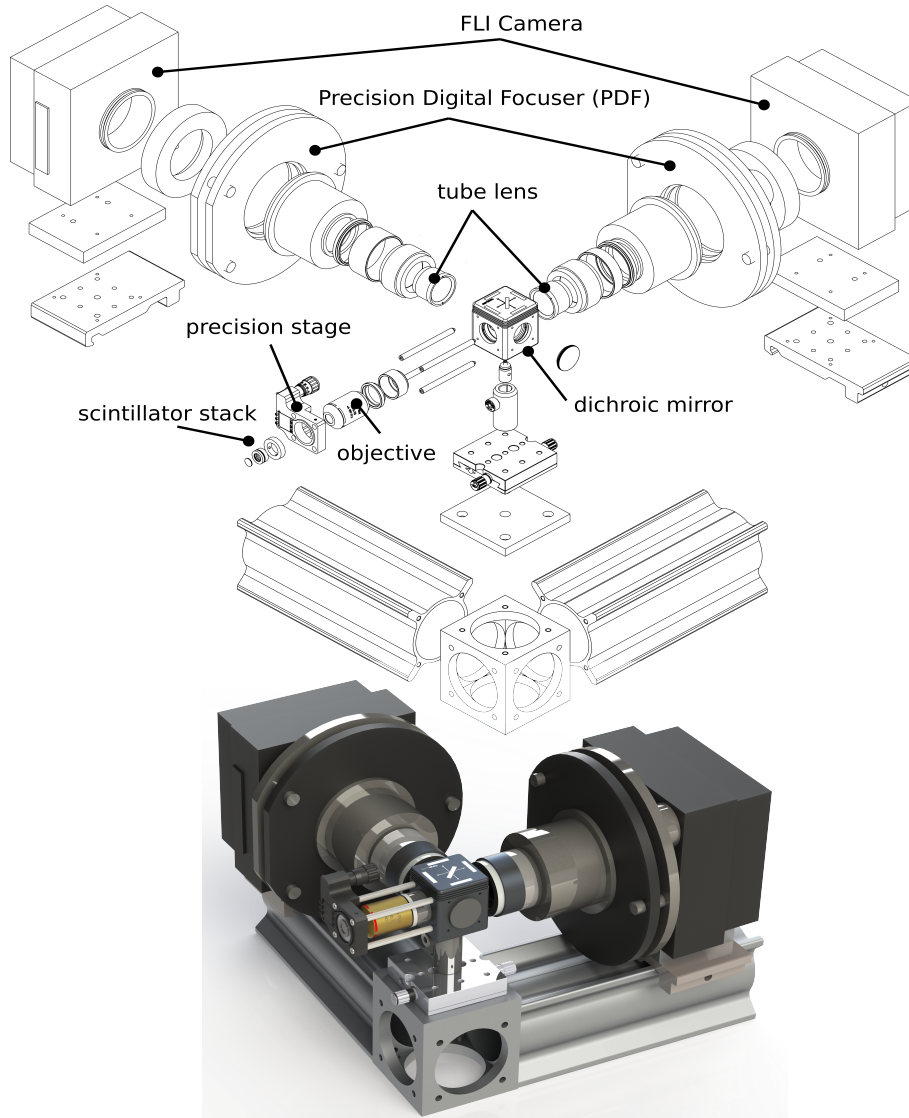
EXPLOSION DRAWING AND 3D RENDERING OF THE DUAL-DETECTOR ASSEMBLY.
